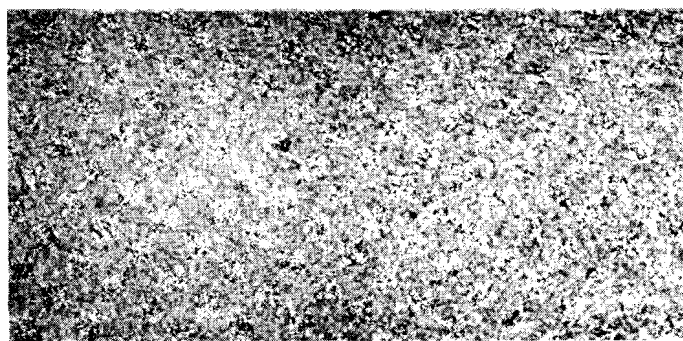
TYPICAL 3Al-2.5V CWSR TITANIUM TUBE SURFACE CONDITION
